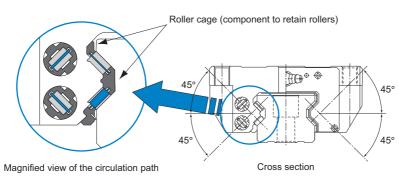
Structural Drawing of the Caged Roller LM Guide Model SRG
